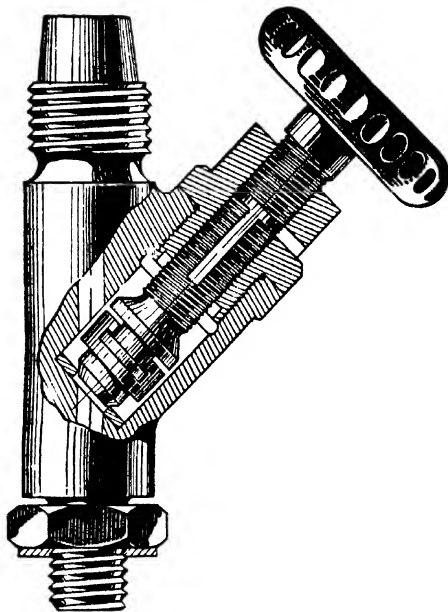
“DOBBIE-McINNES” DIESEL INDICATOR VALVE, SHOWN CLOSED TO ENGINE AND INDICATOR, OPENED TO ATMOSPHERE
